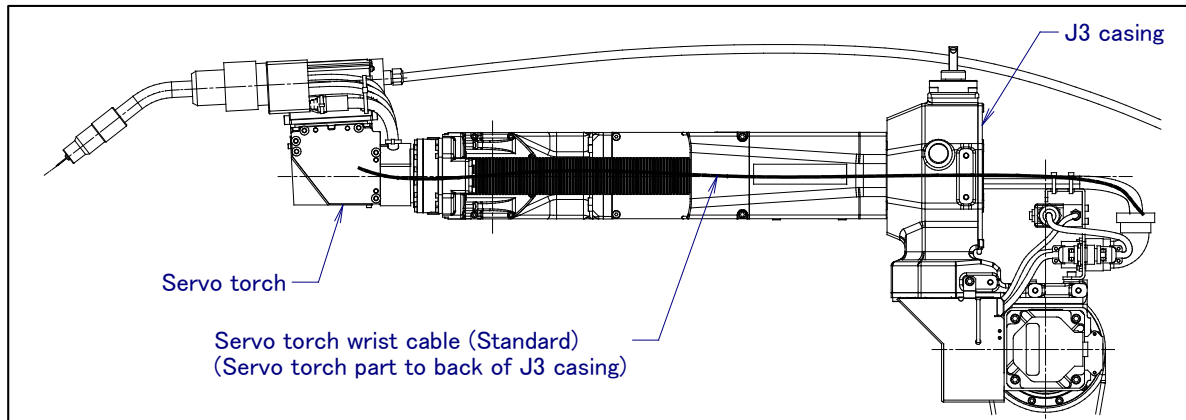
Fig. A (c) Cable mounting figure of servo torch wrist cable (In case of standard specification)
